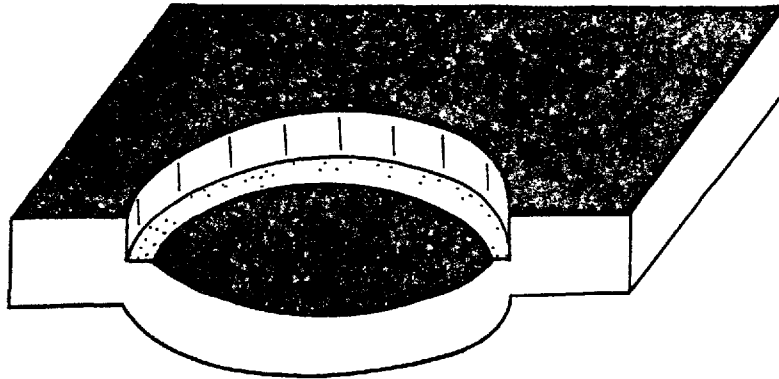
The ring of scratched paint on a partly blanked specimen indicates the contact area between the punch and the specimen during blanking.
